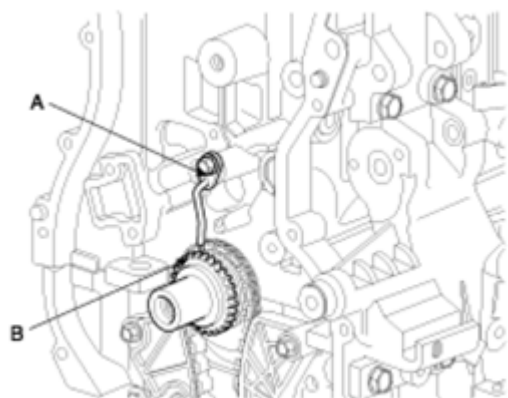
Identifying Timing Chain Oil Jet & Crankshaft Chain Sprocket
